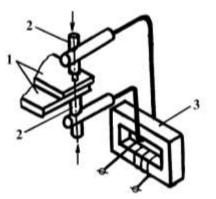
Spot welding: 1 – work pieces; 2 – electrodes; 3 – transformer; P – pressure
